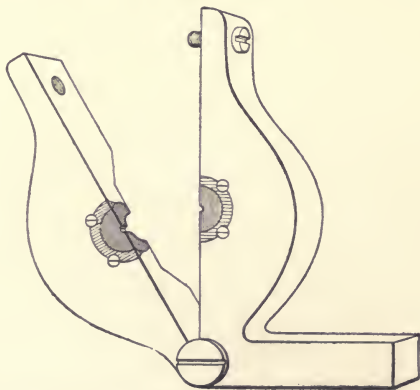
Split Jewelled Draw-Plate for Cutting Parchmentised Thread.
